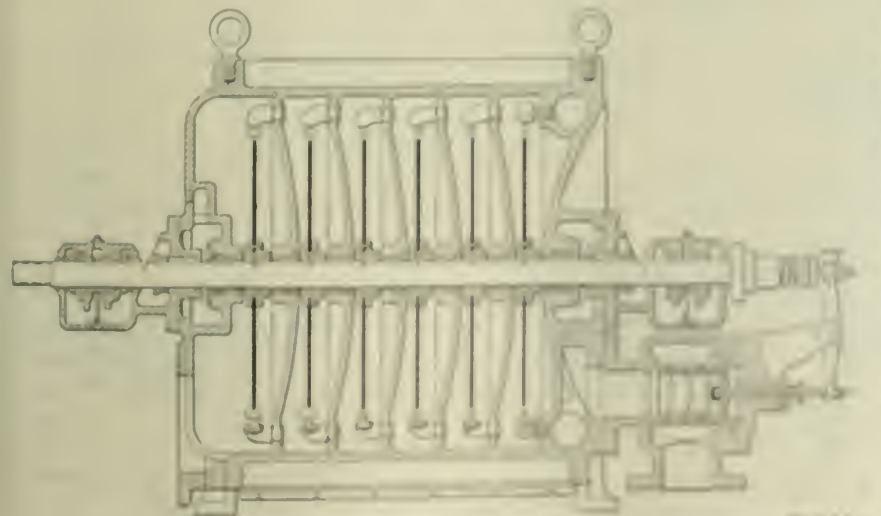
MECHANICAL VIEW OF SMALL TURBINE, 75 R.P.M.
